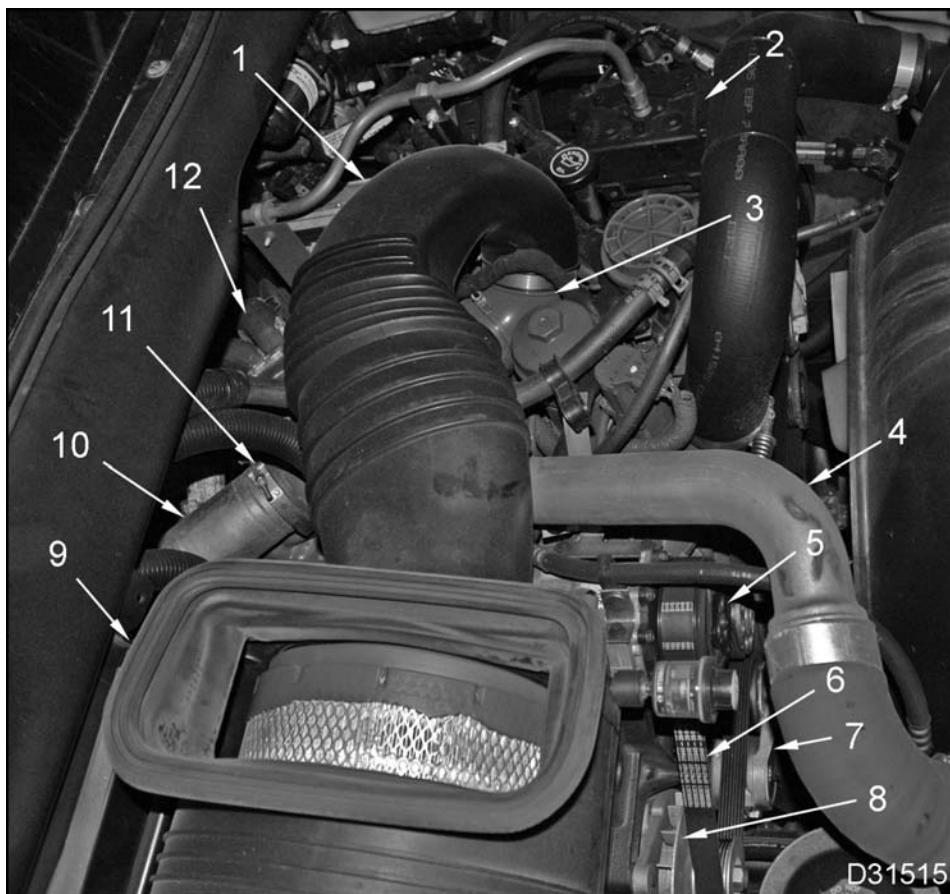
Parts for Installation – Engine In-chassis (4100 truck)
